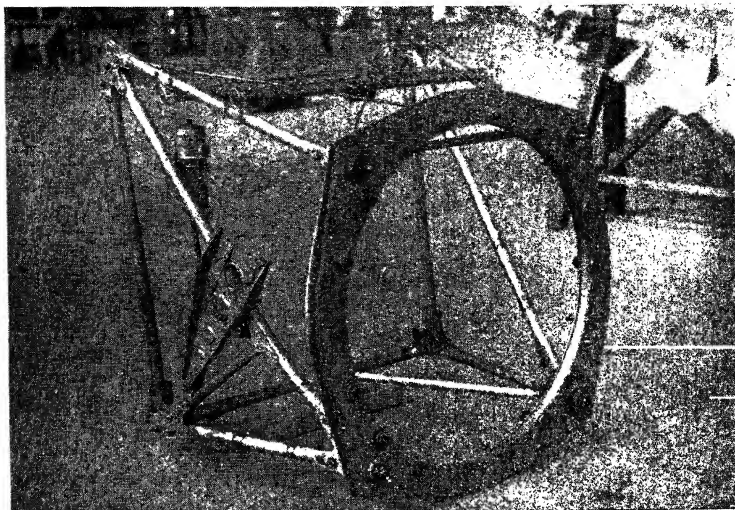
THE BUILT-UP TYPE OF ENGINE MOUNTING.
